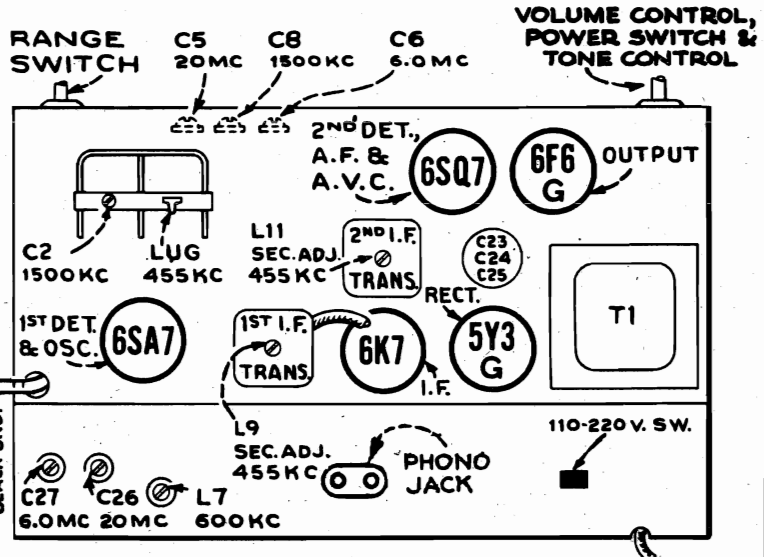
TUBE, TRIMMER AND PARTS LOCATION
